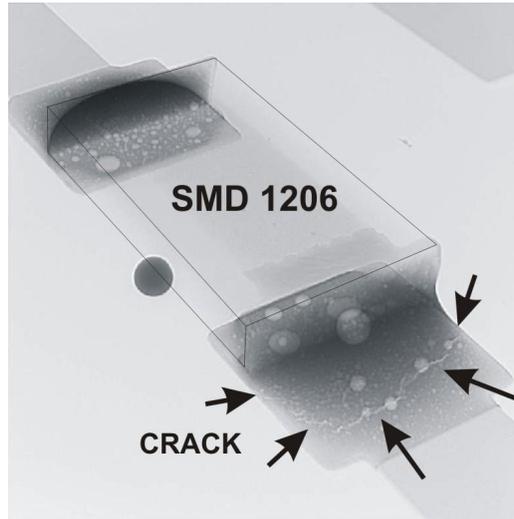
Cracked SnAgCu solder joint (X-ray picture)
